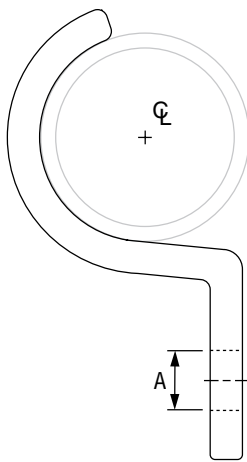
WEIGHTS (LBS) • DIMENSIONS (IN)
